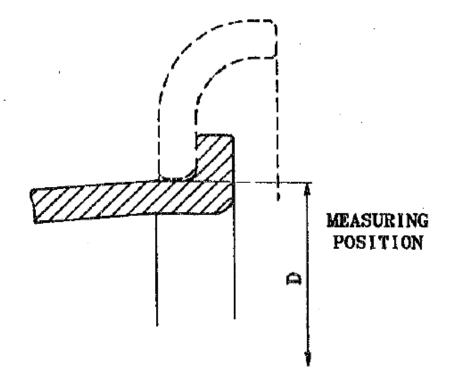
DIMENSIONS FOR MEASUREMENT OF RIMS WITH TWO MOUNTABLE FLANGES
